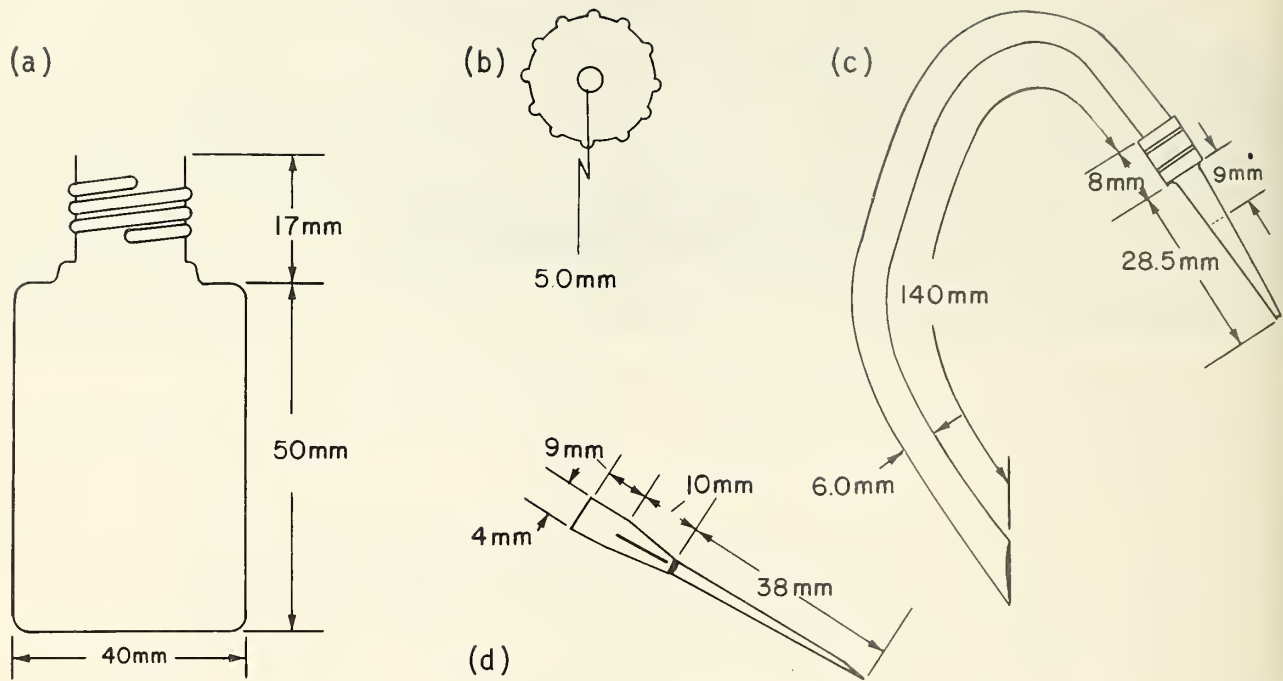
Scale drawing of components of the improved pollinator: (a) polyethylene squeeze wash bottle; (b) bottle cap with top opening 1 mm smaller than hose; (c) hose and nozzle; and (d) disposable hypodermic needle.
